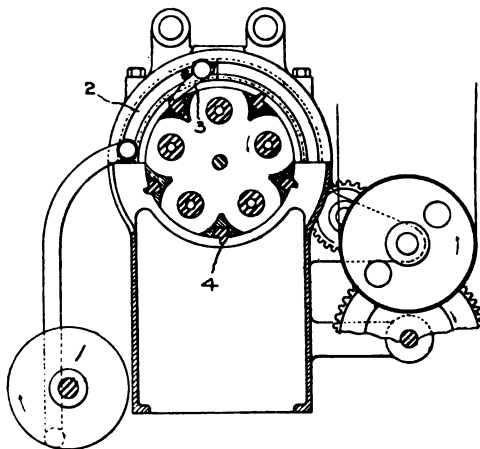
INDEX FOR TURRET OF MULTIPLE SPINDLE MACHINE. DAVENPORT MACHINE CO.
